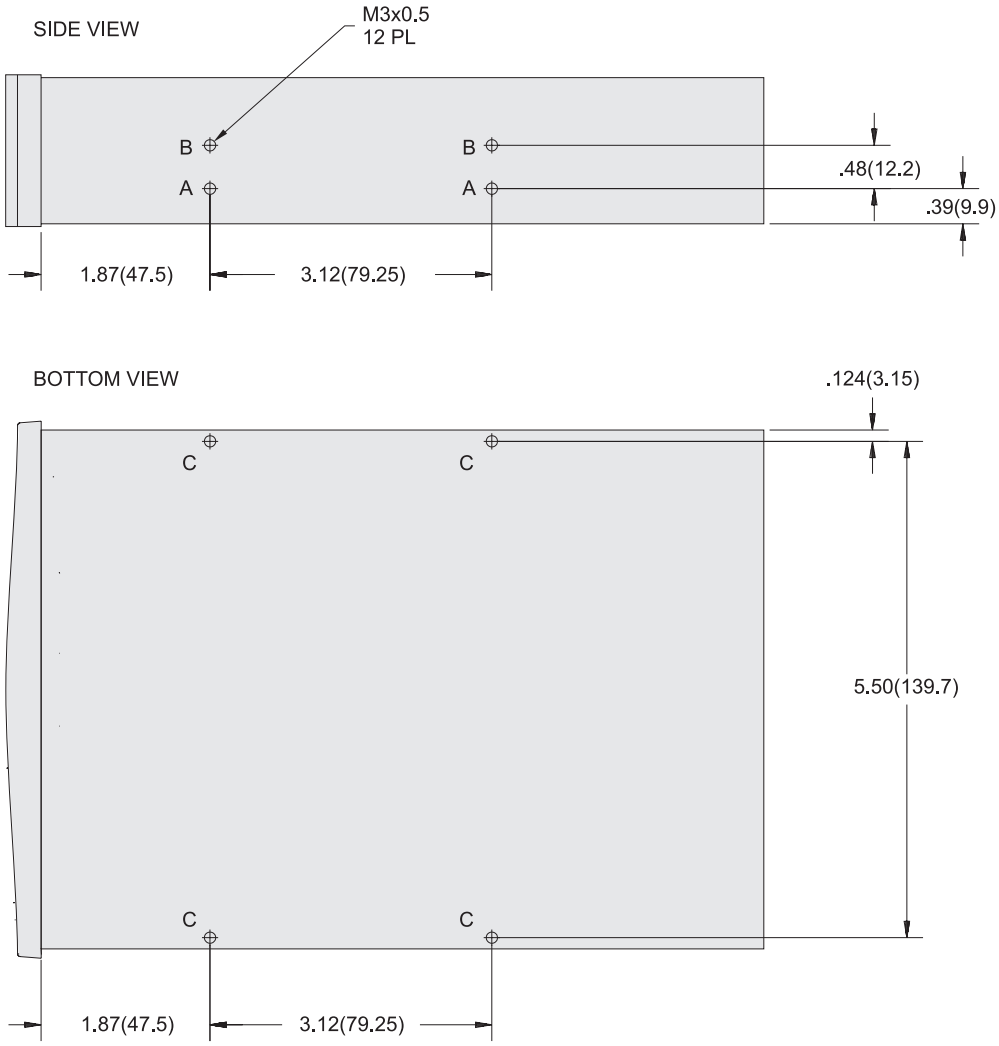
Mounting holes in inches and millimeters (three sets of four)
